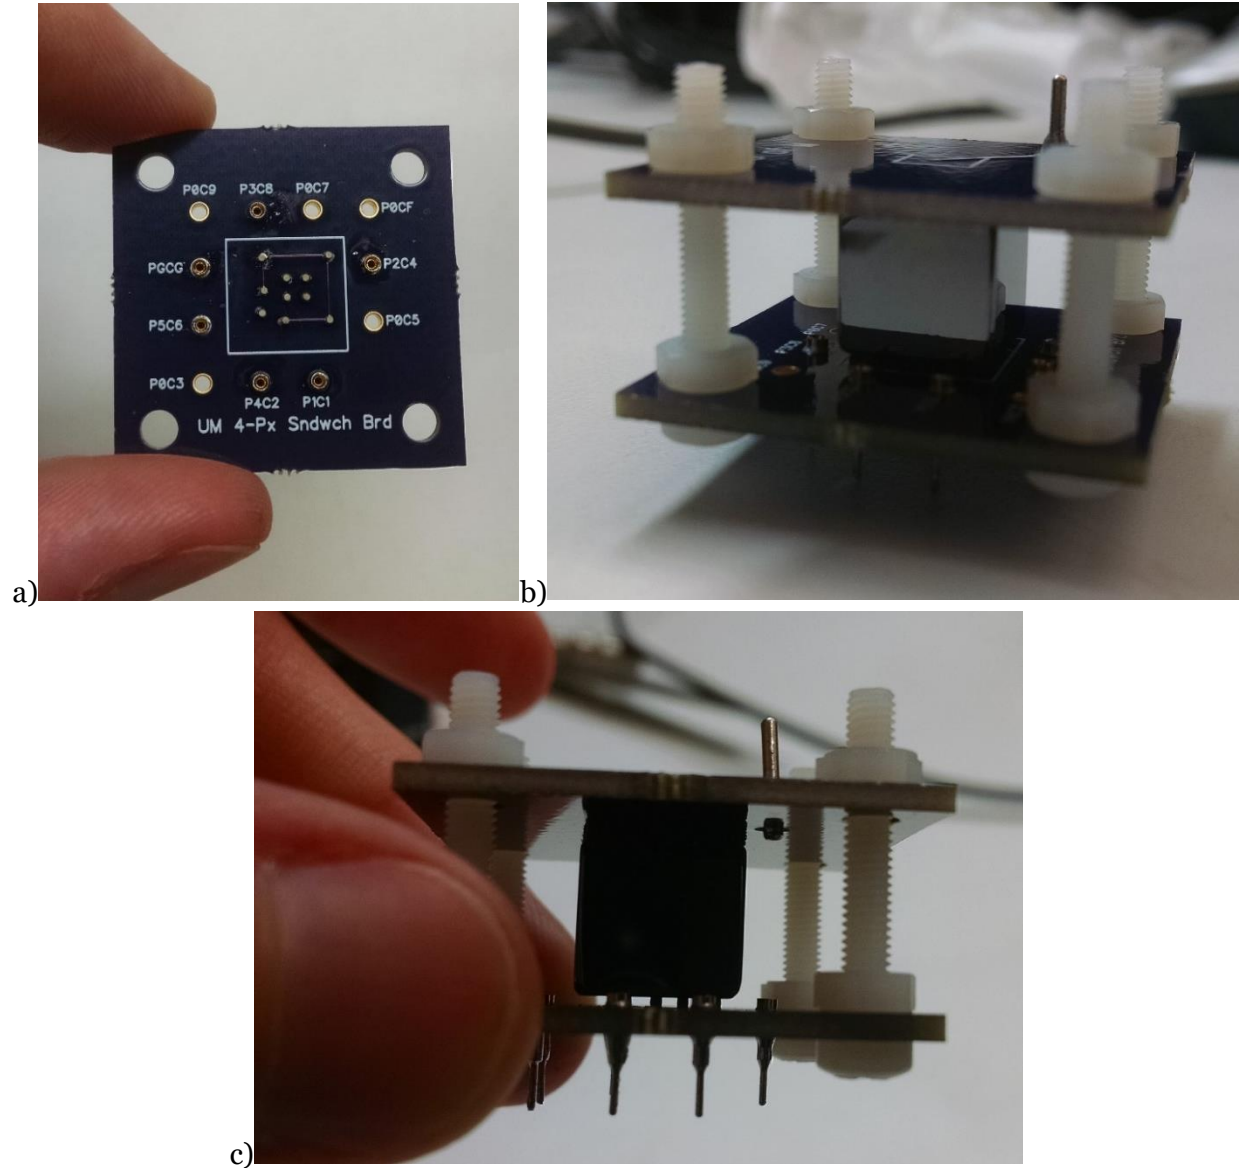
Photos of a) a board with Invisipins mounted and b-c) the sandwich assembly with BNL1-S2 installed.
